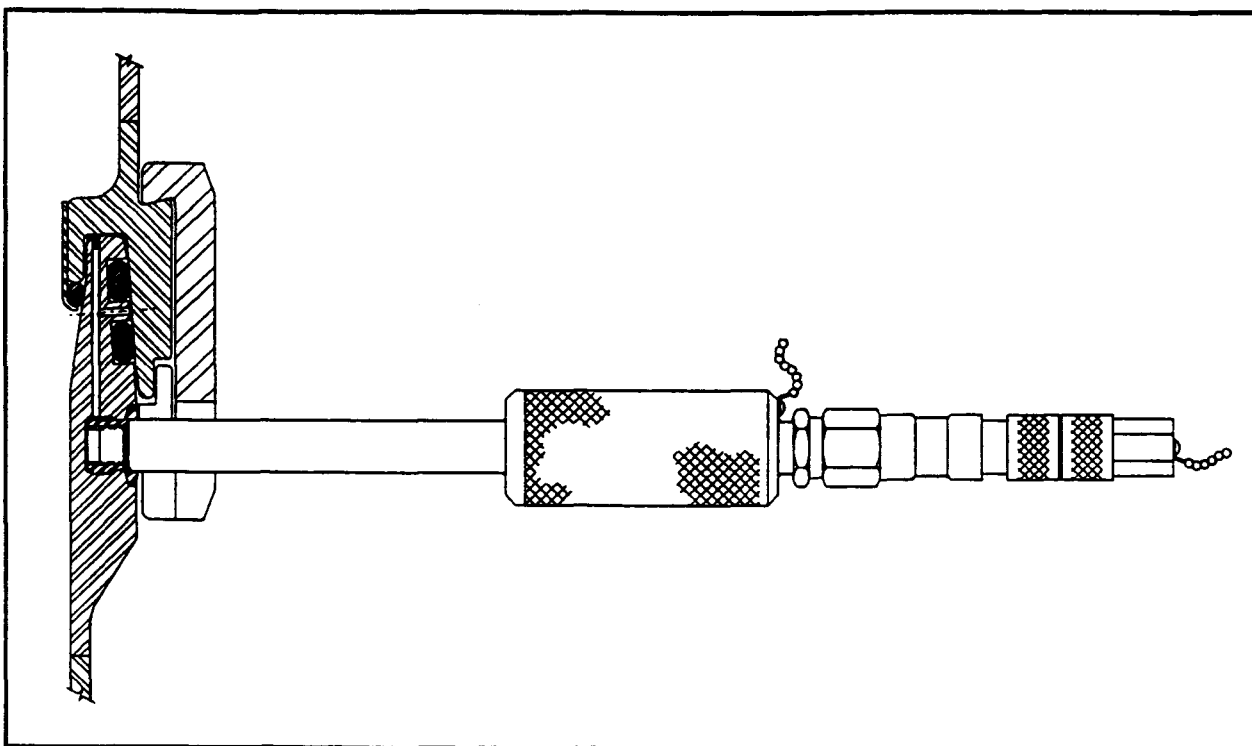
(a) ICV Vent Port Plug Removal/Pressure Relief Tool (2077-091-A1)
